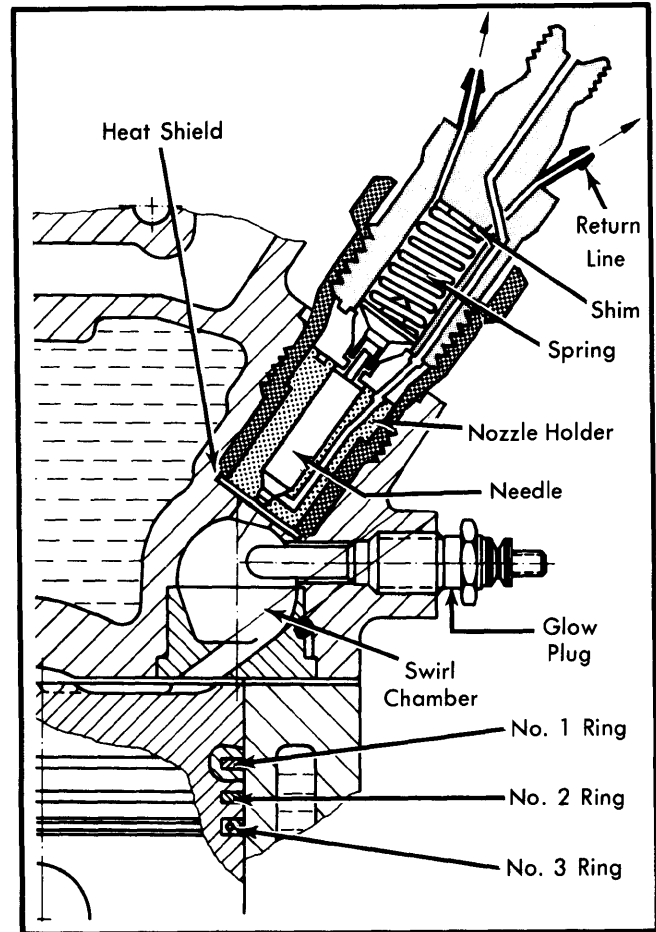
Cutaway View Showing Relationship of Injection Nozzle, Glow Plug & Swirl Chamber to Piston
